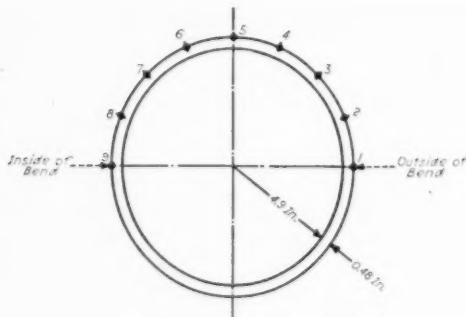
CROSS-SECTION OF PIPE SHOWING POINTS WHERE STRESS WAS MEASURED
